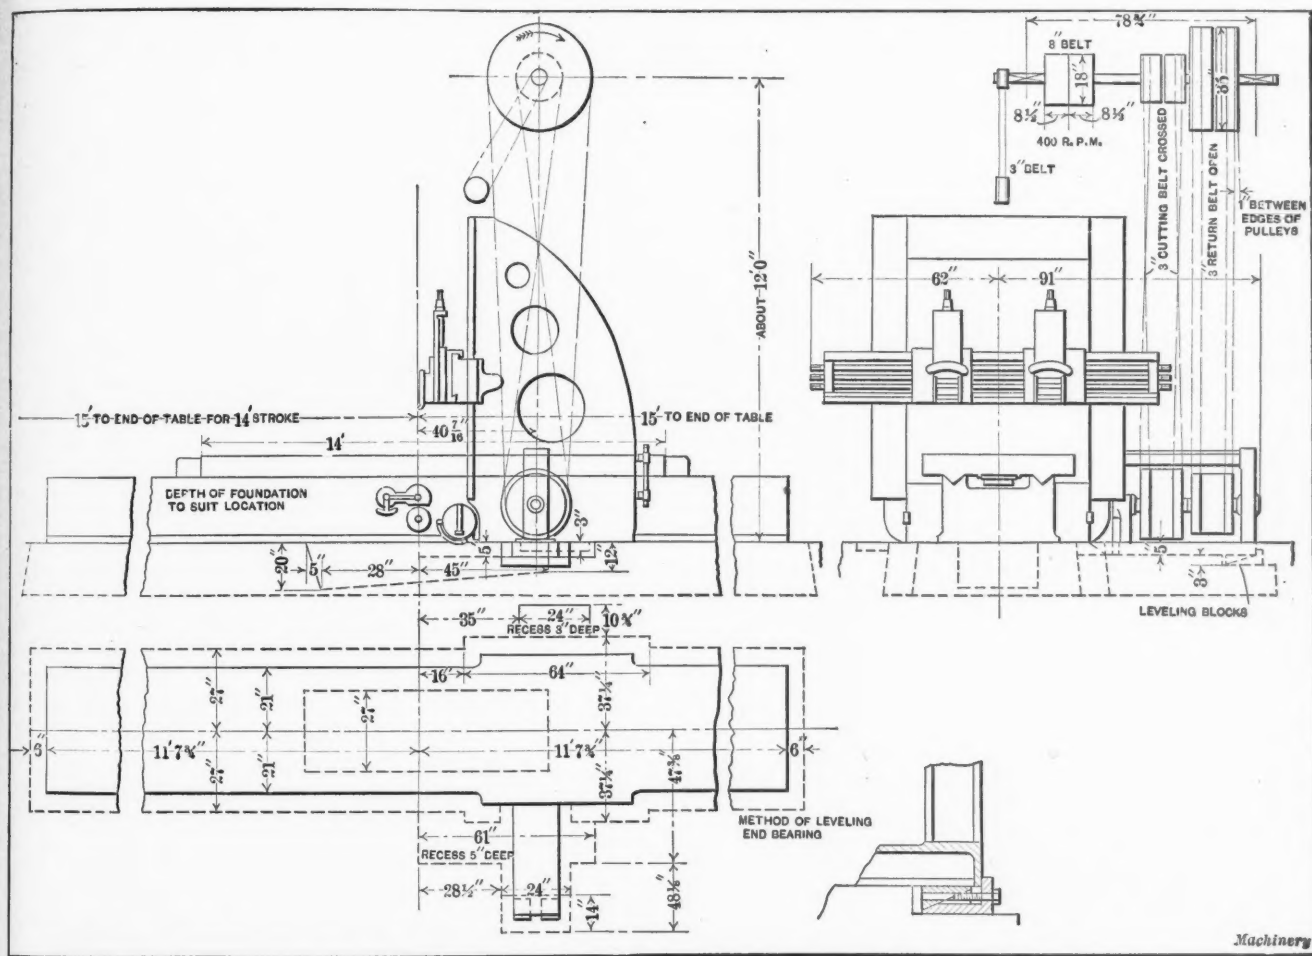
Foundation Plan for a 62-inch by 62-inch by 14-foot Planer
